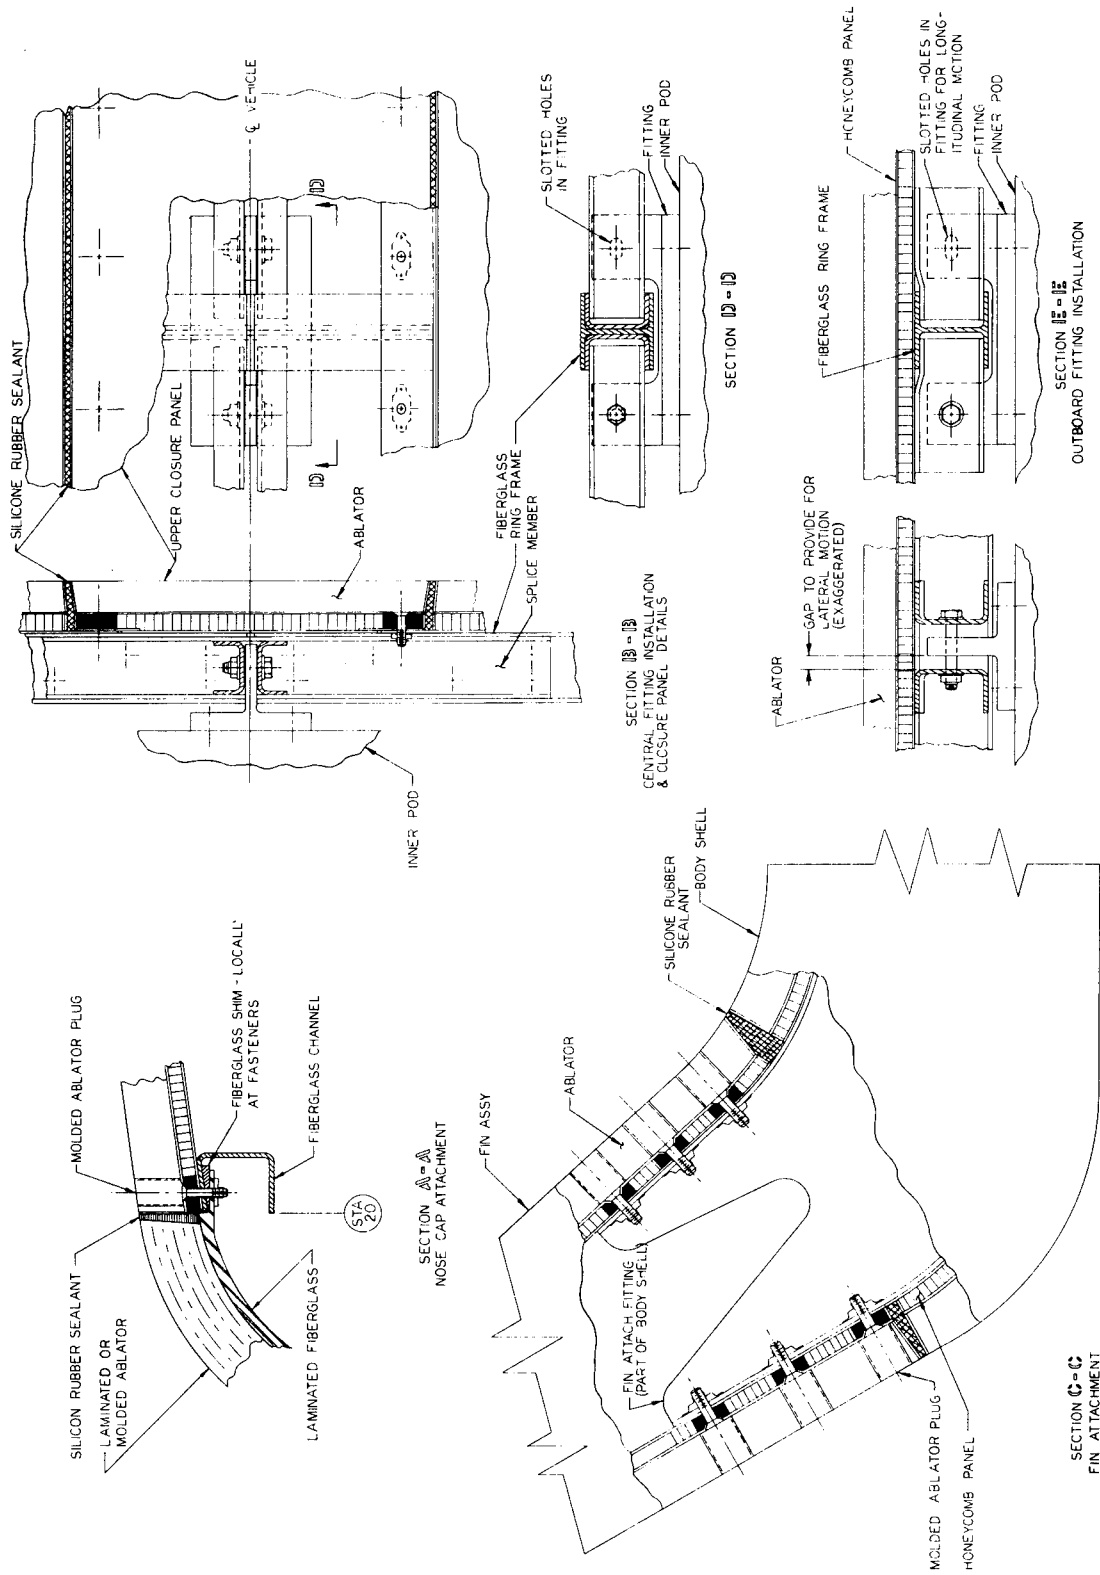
ASSEMBLY DETAILS, DOUBLE WALL CONCEPT, FIBERGLASS SHELL
